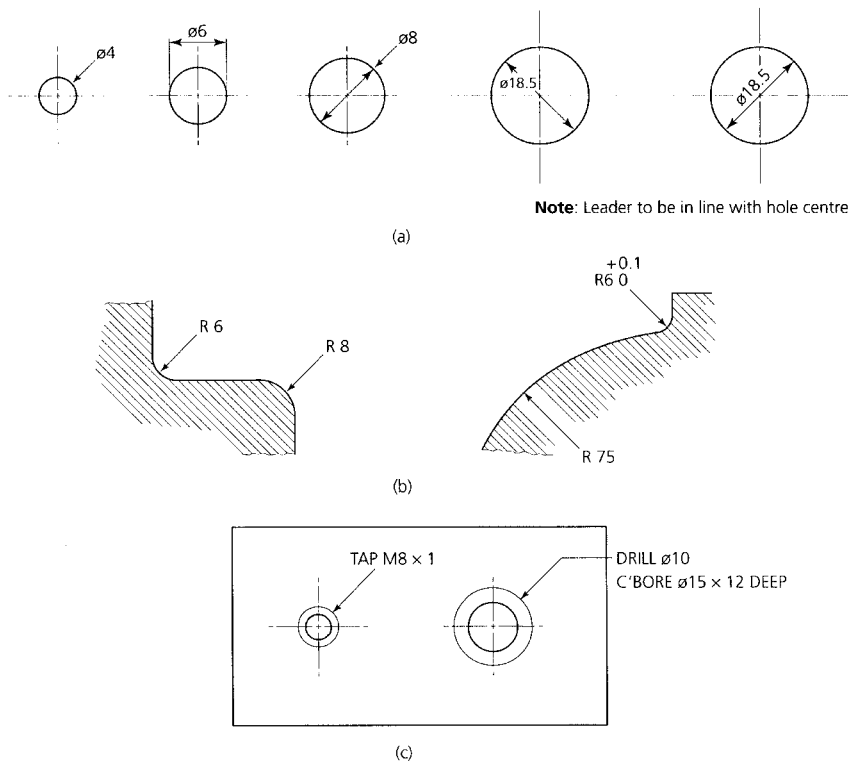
Dimensioning – diameters and radii: (a) dimensioning holes; (b) dimensioning the radii of arcs which need not have their centres located; (c) use of notes to save full dimensioning
